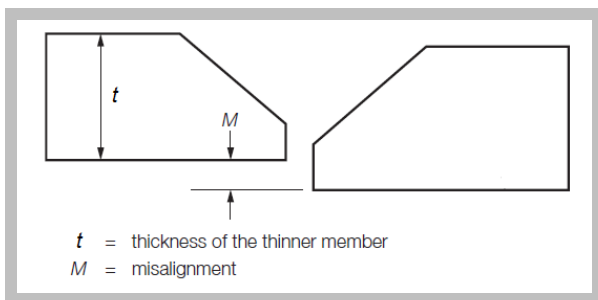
Misalignment of plate edges in butt welds
